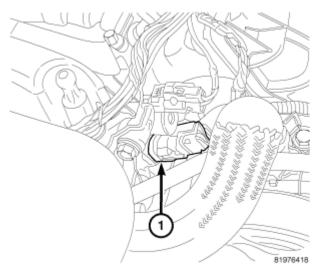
OIL TEMPERATURE SENSOR Courtesy of CHRYSLER LLC
